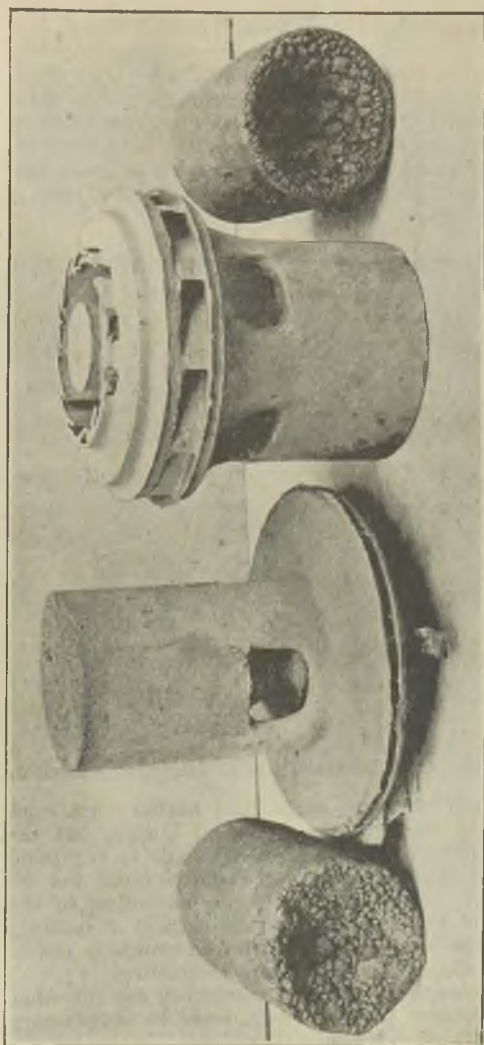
TWO TYPES OF IMPELLER CASTINGS WITH RISERS.
